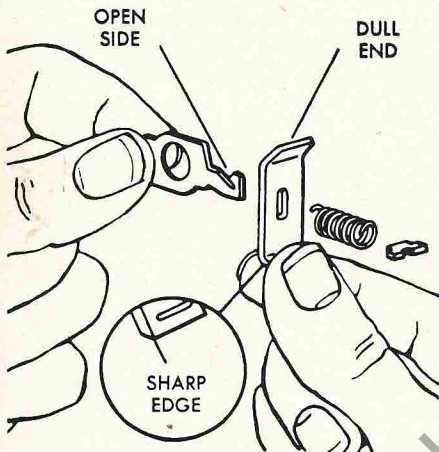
A—Fairbanks-Morse friction shoe unit is serviced as complete assembly only. However, if unit has been disassembled, it must be reassembled as shown. Refer to Fig. HL64 for complete view of Fairbanks-Morse starter.
